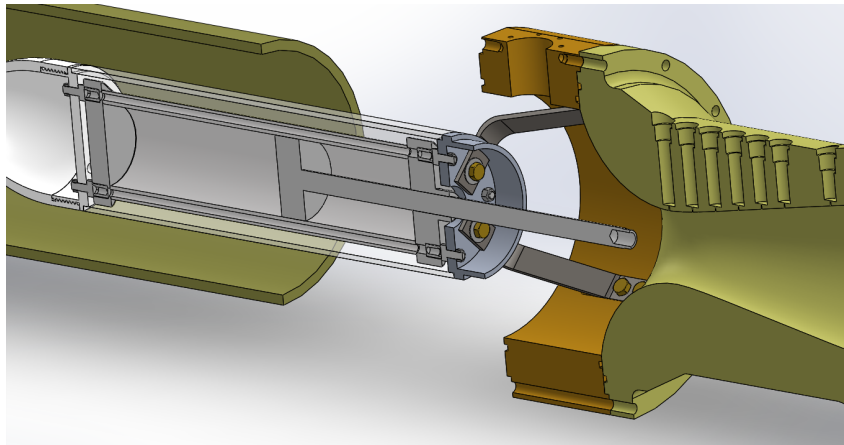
Section view of the piston attached to the front end cap, installed on the nozzle.
